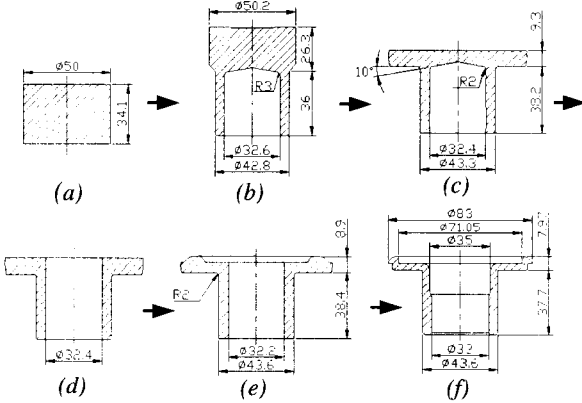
Schematic description for the forming sequence process of the impeller hub (Present) : (a) Bar Cutting, (b) FWD Extrusion, (c) Upsetting, (d) Piercing, (e) Finisher, (f) Machining
